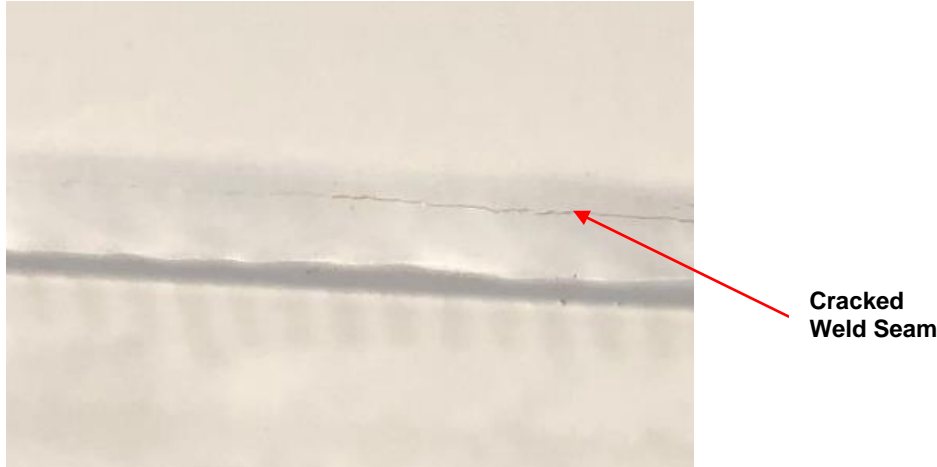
TL80, TL80/112 & TL100: Weld to Inspect (Lower Boom not Shown for Clarity)
